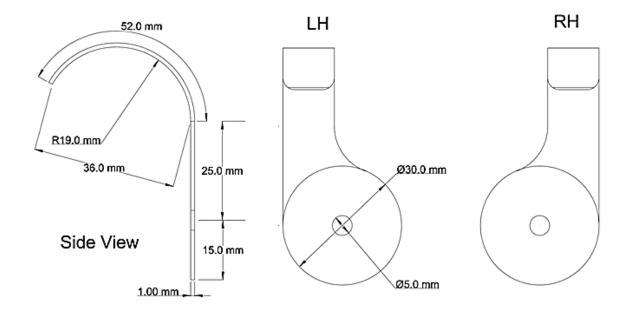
Diagrams and dimensions of the metal finger inserts, showing side, left-hand (LH) and right-hand views. The fingers were constructed from 2.5 mm thick aluminium. Schematic drawings provided courtesy of Julian Sparrey.
